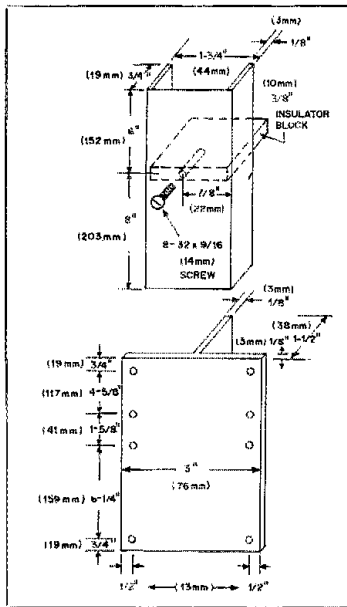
Construction details of the T bar and U channel for the base mounting assembly.
